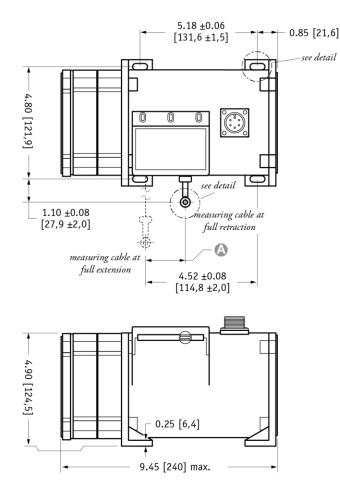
Outline Drawing (36 oz. cable tension only)
